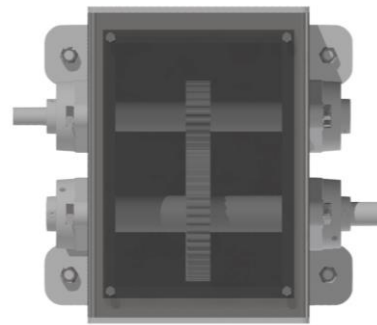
3D model of the dedicated gearbox module with a gear ratio of 1.42 – top view
